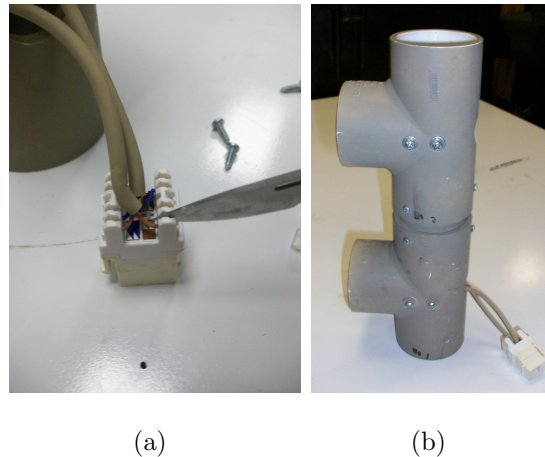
Assembled sensing components joined by a CAT6 jack. (a) CAT6 jack punching close view and (b) Assembled components of one sensing pair joined by a CAT6 keystone jack.
